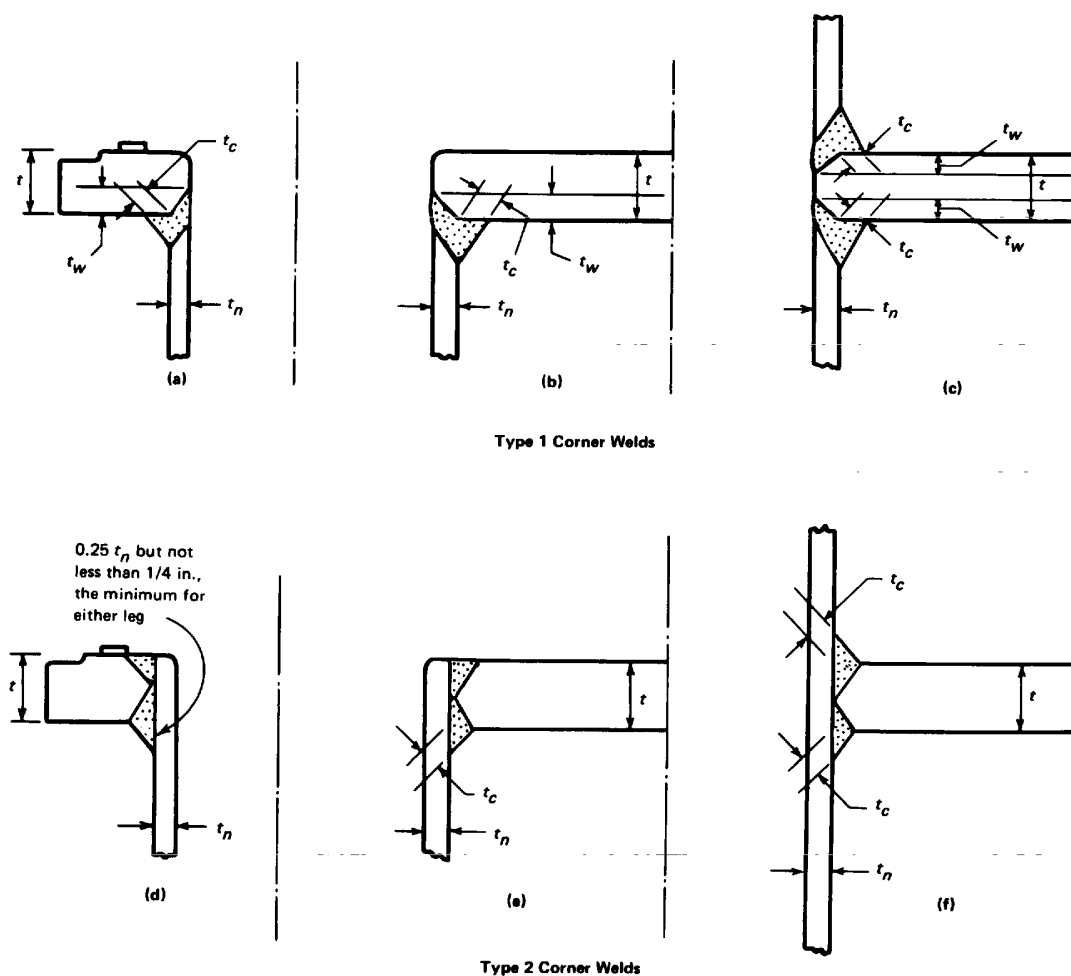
ACCEPTABLE FULL PENETRATION WELD DETAILS FOR CATEGORY C JOINTS
